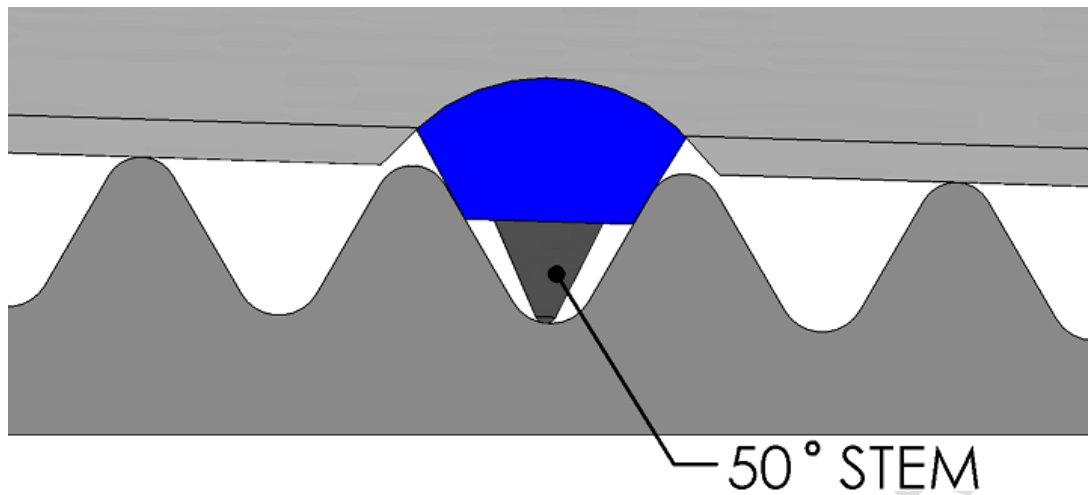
Thread Height Contact Point (Round Thread Height Gauge)
